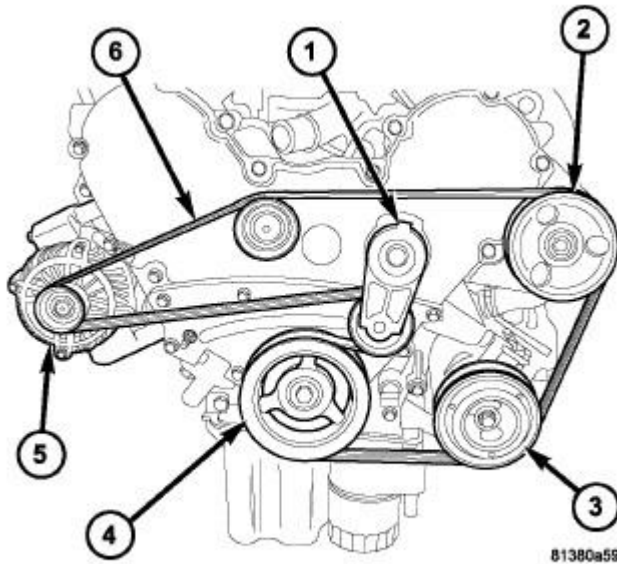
ACCESSORY DRIVE BELT ROUTING
